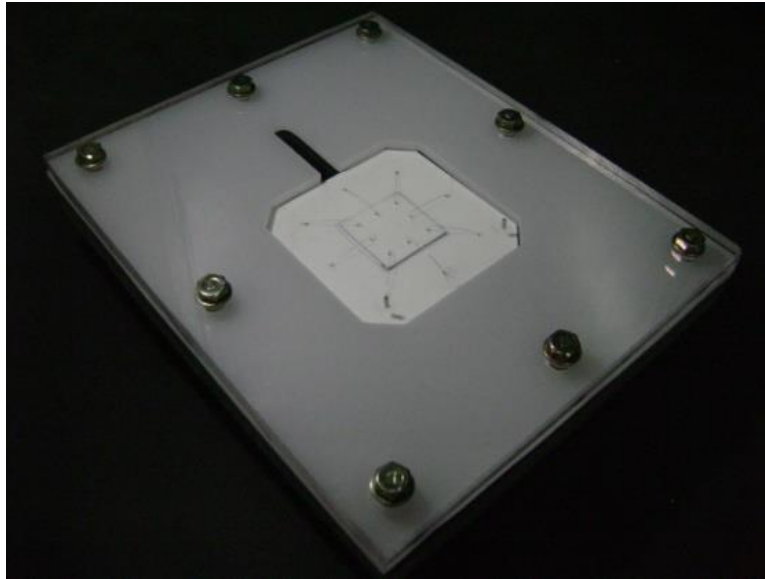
Detailed construction of mould of scale-up eight-wire PBGA model with centre inlet.
